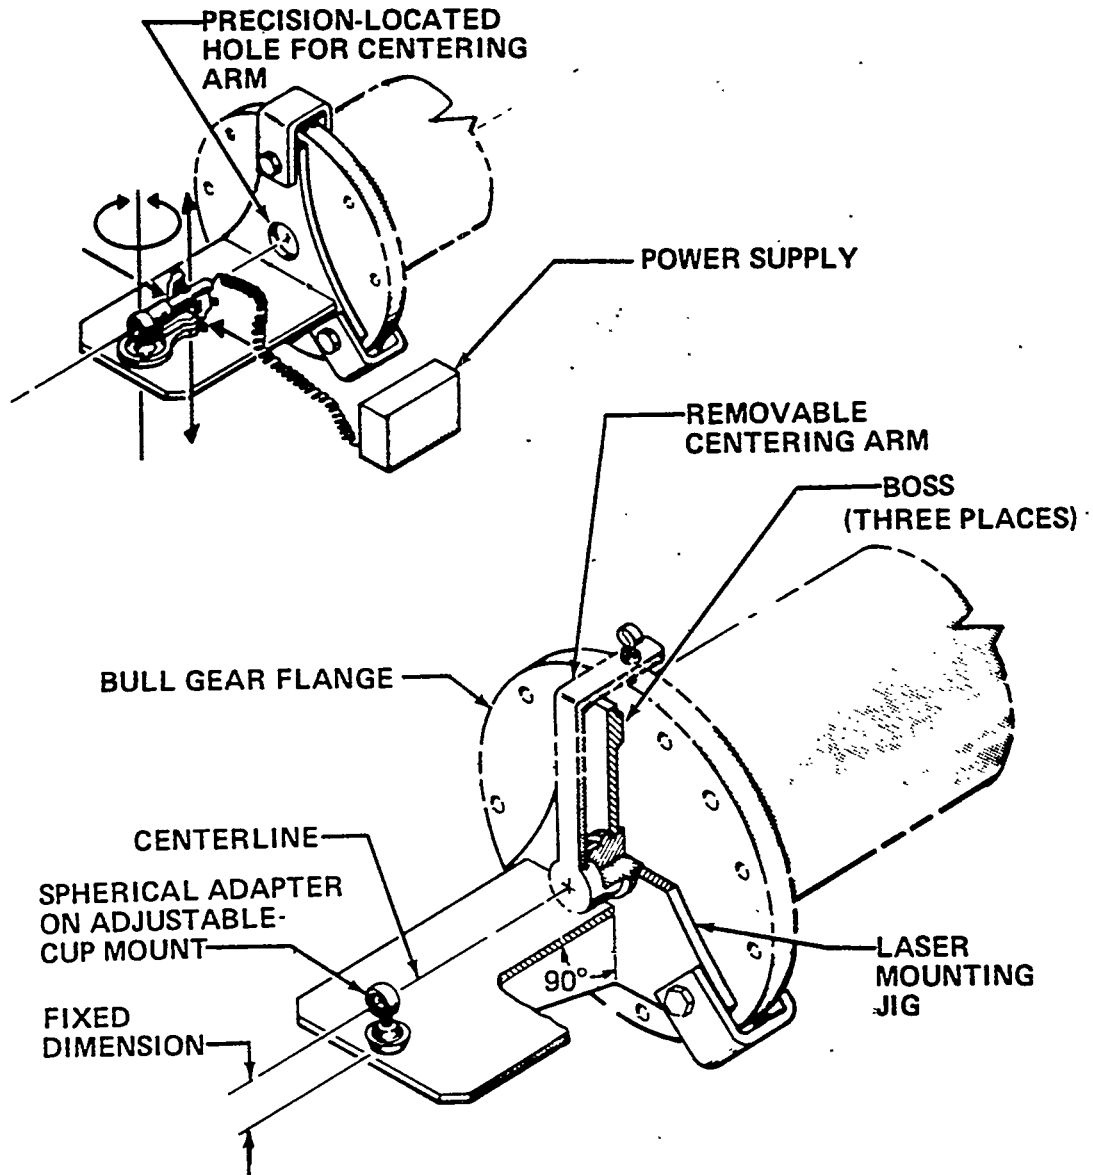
Bull Gear Mirror and Target Jig for Solid-Shaft Alignment
